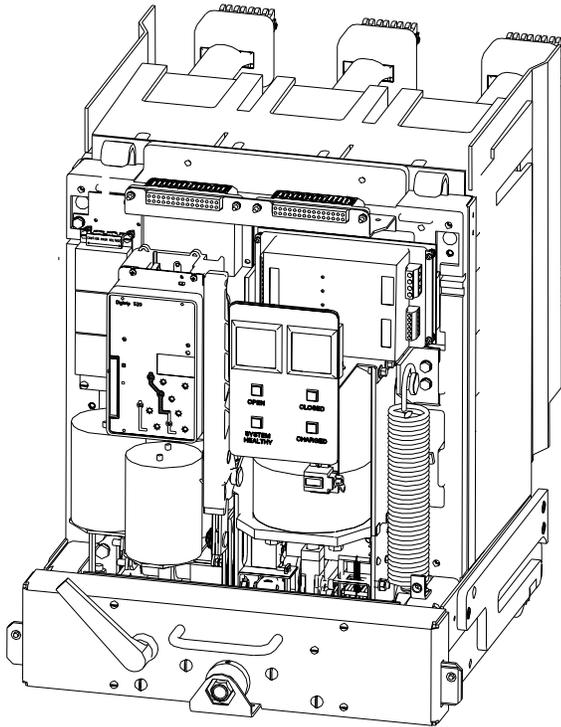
Draw Out Circuit Breaker (Front Cover Removed)
